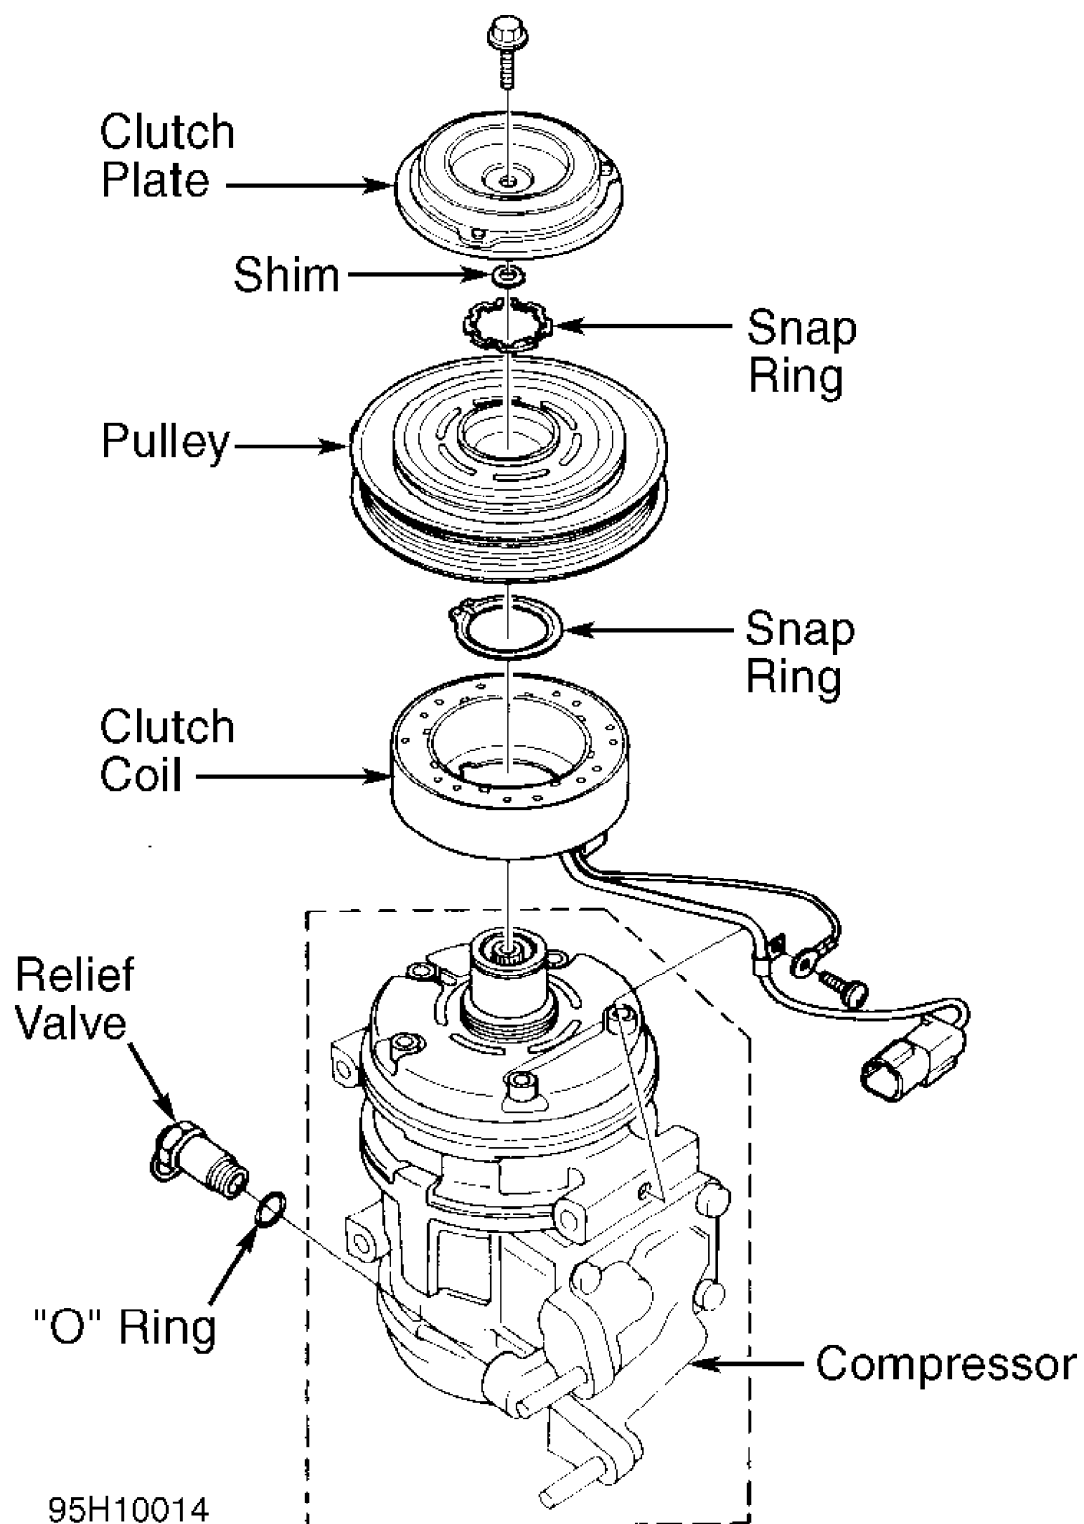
Exploded View Of Nippondenso 10-Cyl. Compressor (Typical)
